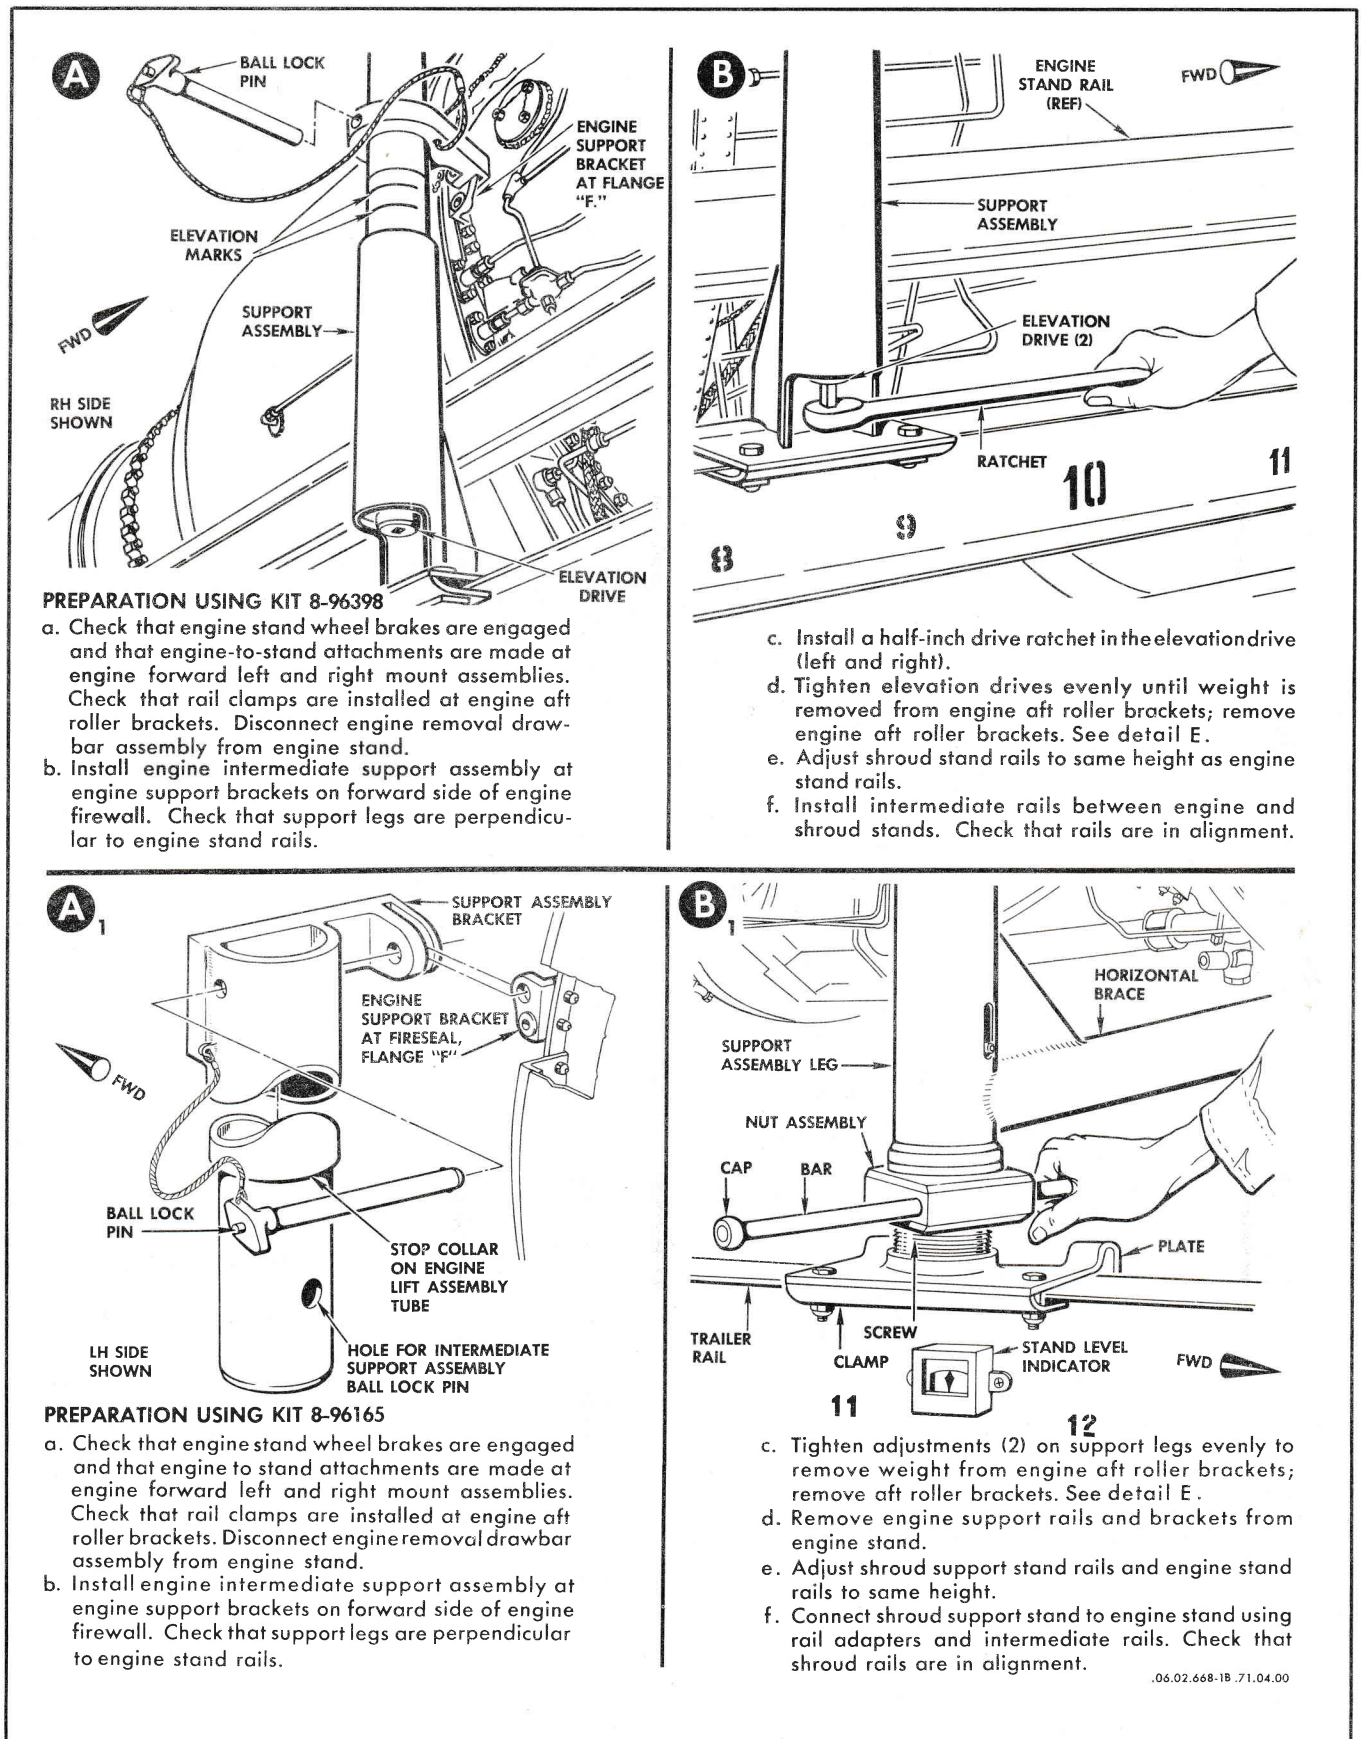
Replacement, Engine Shroud Using Stand USAF ETU-8/E (Sheet 1 of 4)
